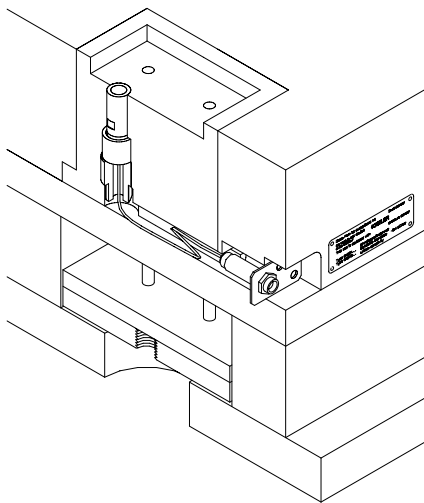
Sensor, cable, mounting plate (Art. No. 3.520.328) and identification label (Art. No. 3.520.842)
